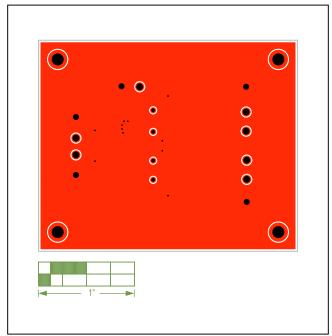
MAX44285 EV Kit PCB Layout—Solder Side
